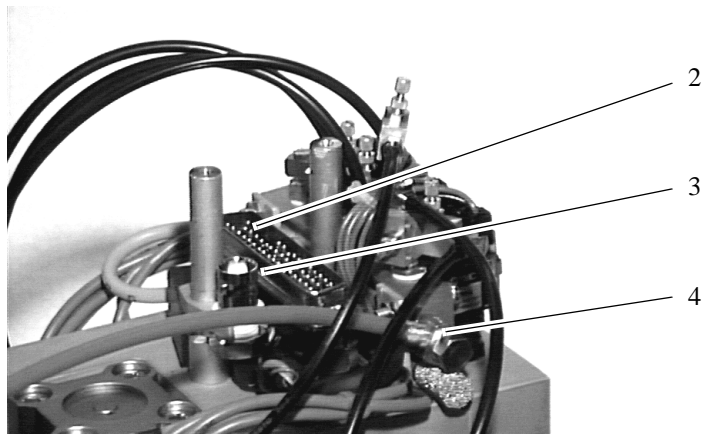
Connections: Gripper Cable on the Gripper (Vision System)
